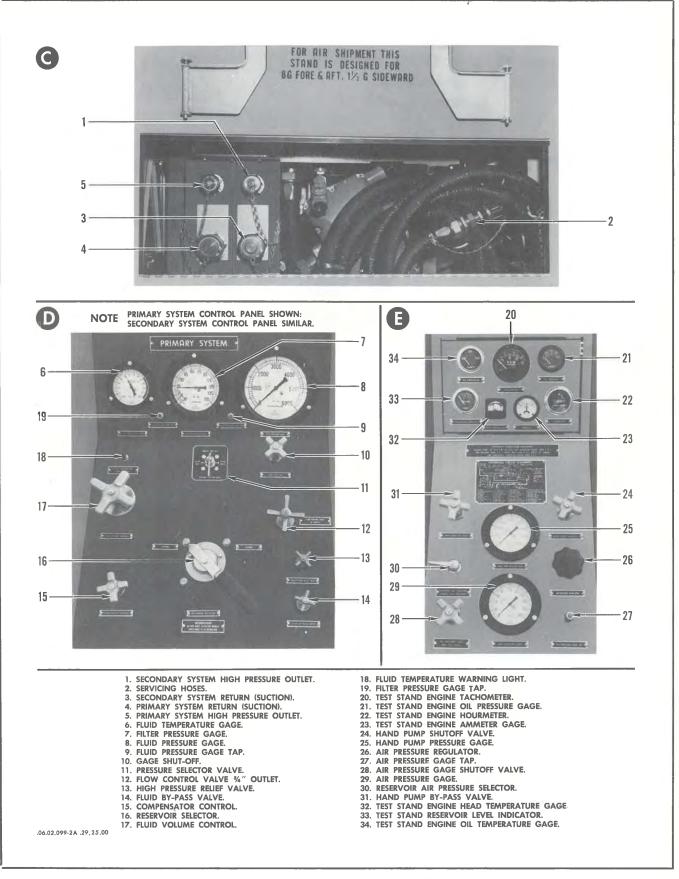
Alternate Hydraulic Test Stand SE0567-801 (4920-204-2462) (Sheet 2 of 2)
